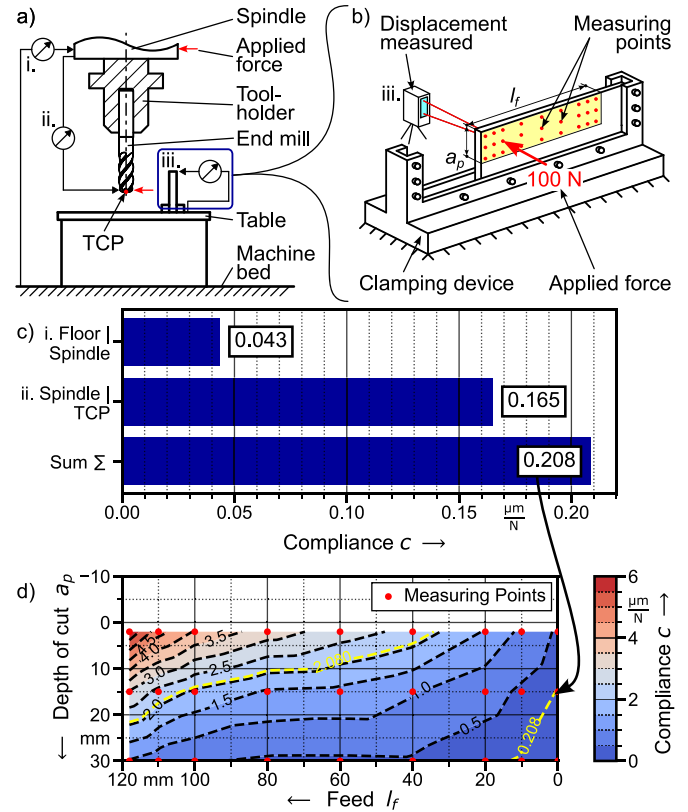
Analysis of static compliance: (a) Measurement points on the machine/tool; (b) Measurement points on the workpiece; (c) Compliance results of the machine/tool; (d) In-plane compliance results of the workpiece.
